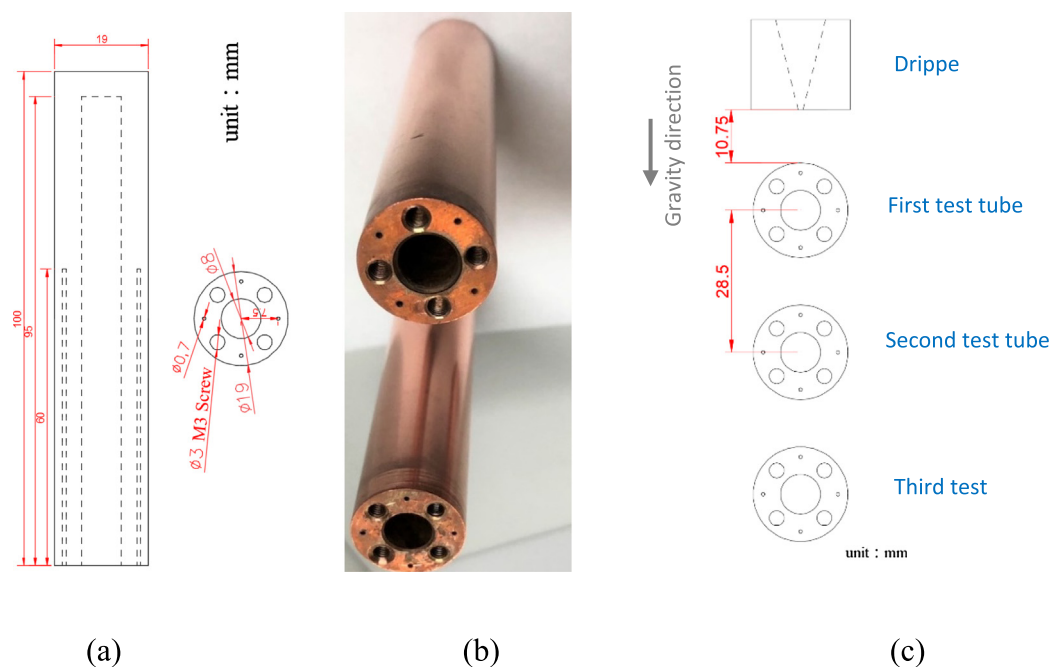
The tubes of the experiment setup. (a) The details of the test tube drawing, (b) the actual photo of the machined test tube, (c) the details of test tube mounting and distances.
